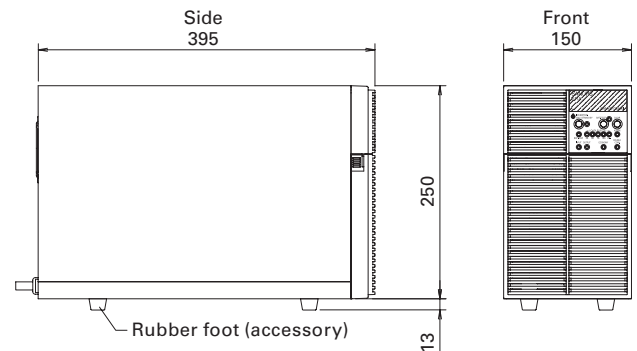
“SANUPS E11A102 tower type” dimensions (unit: mm)
